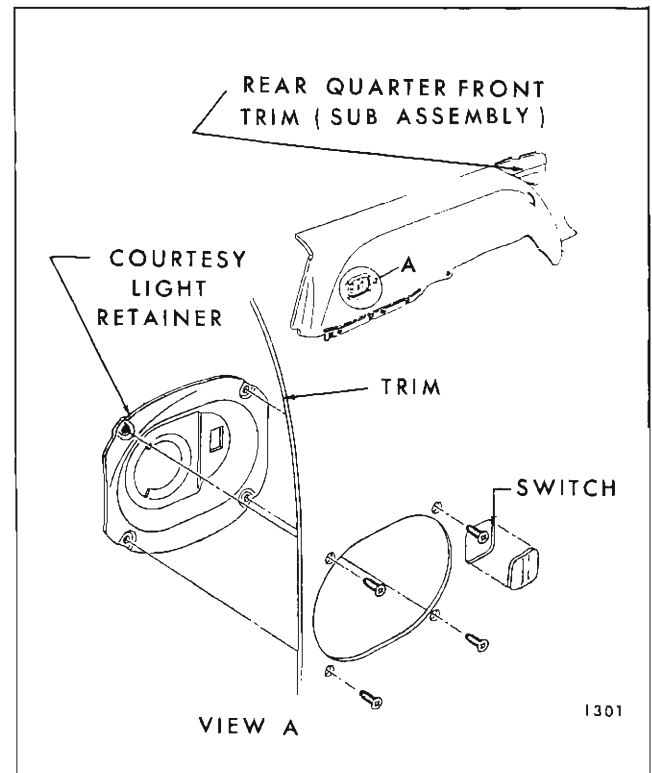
E5—Rear Quarter Inner Trim Panel Assembly
